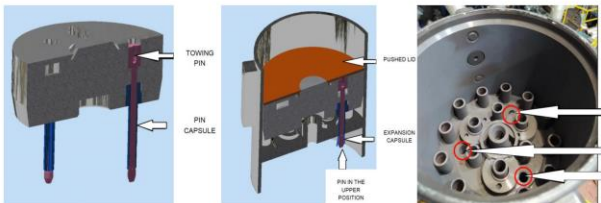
Solution with throwing pins and top of the WWER-1000 fuel assembly (left), location of the inseparable joint (right).
